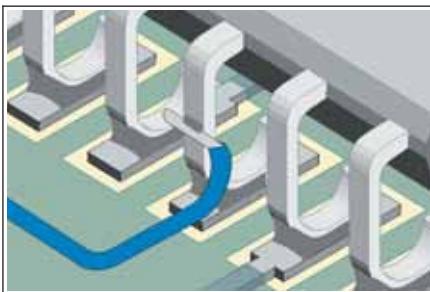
Acceptable Wire soldered to clipped component lead. +
